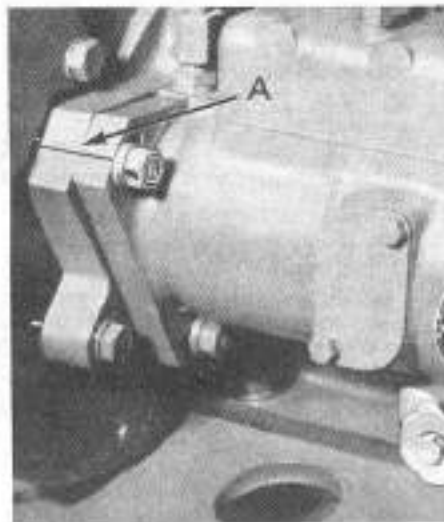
View showing C.A.V. fuel injection pump timing marks.
